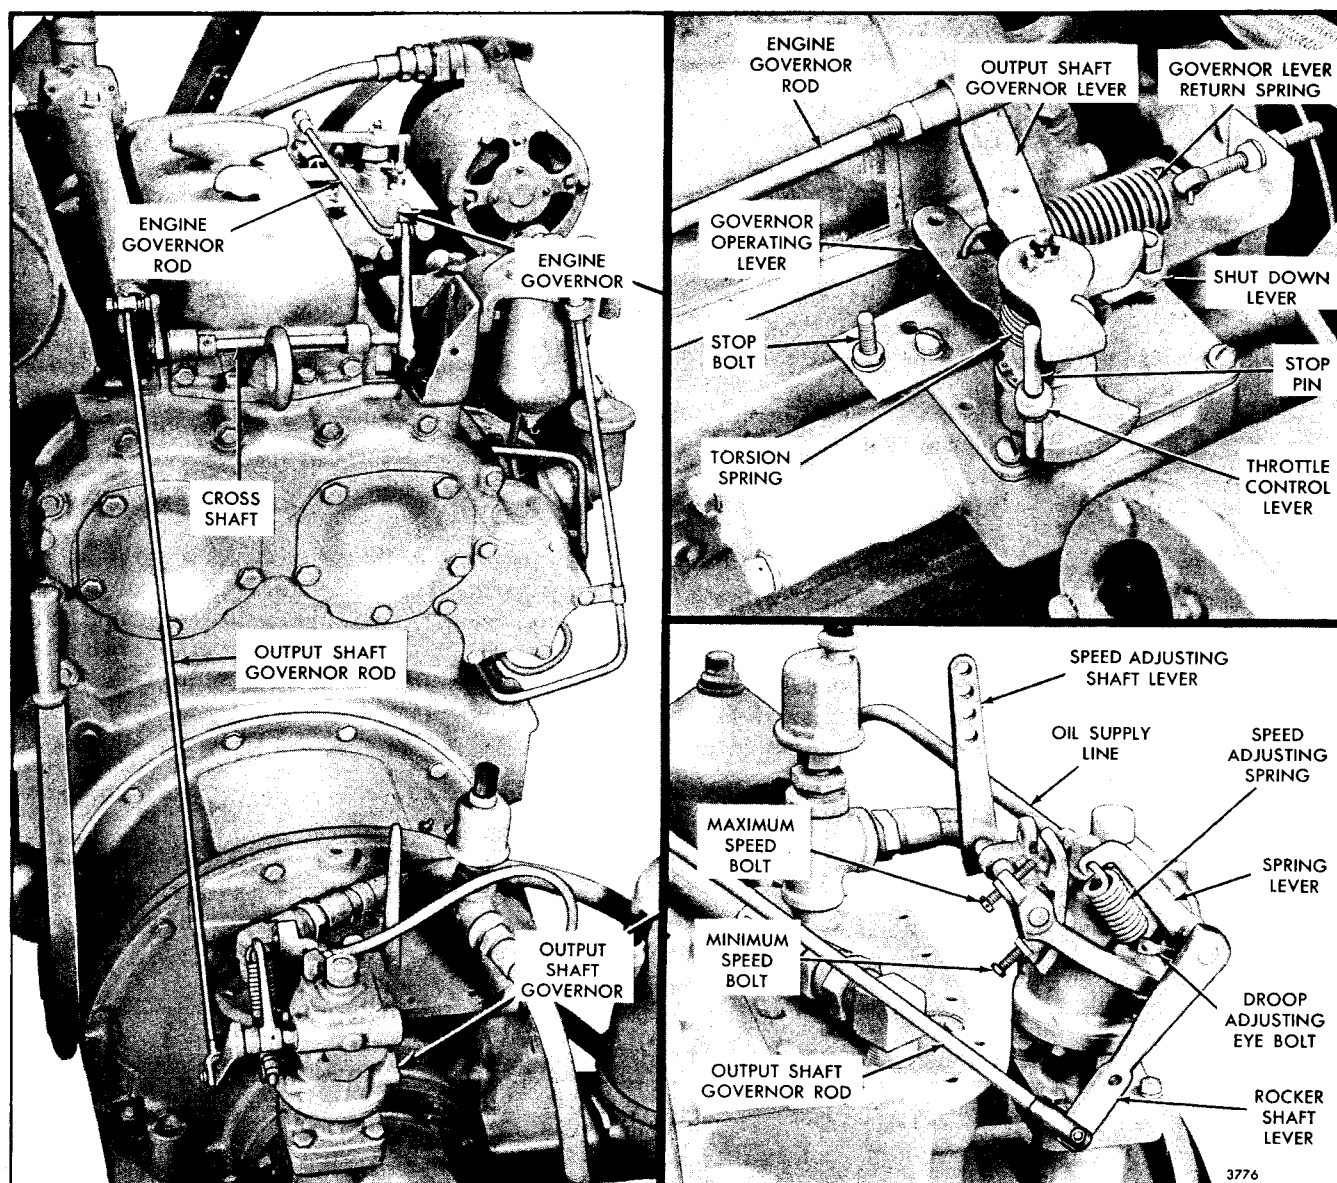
Gear Driven Output Shaft Governor and Linkage
